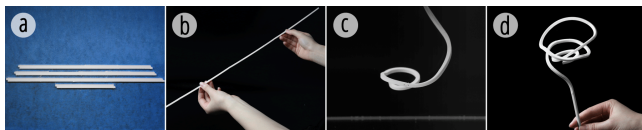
(a) Printed segments. (b) Assembly before triggering. (c) Triggering. (d) The final result.
